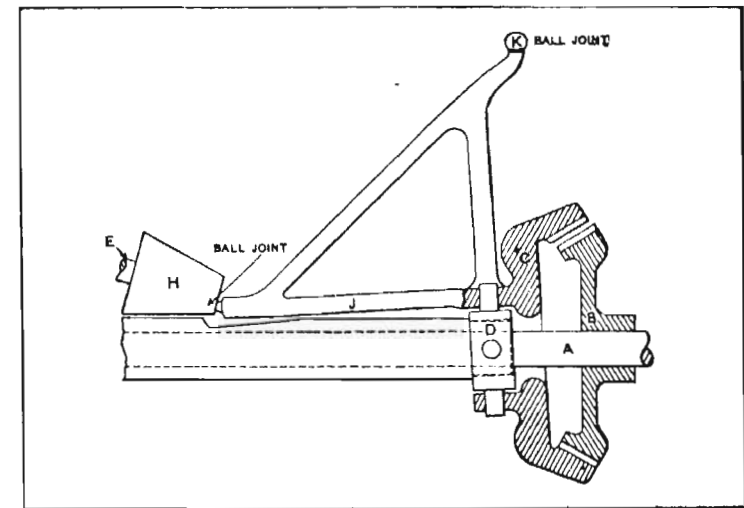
Epicyclic or “Wobble” Gearing for Producing a Rapid Reciprocating Motion
